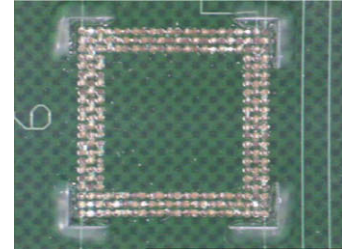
Four UV-cured acrylic edge bonds on a board after component fell off in testing.
